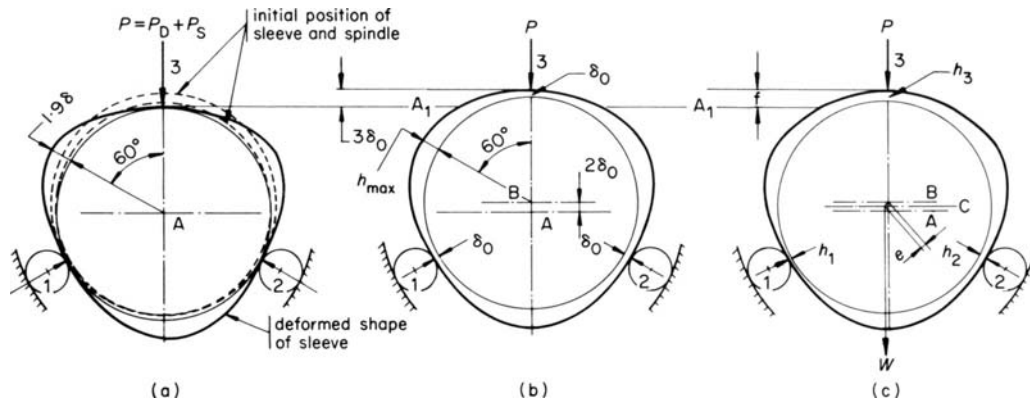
Spindle and sleeve positions: (a) sleeve deformed-spindle stationary; (b) spindle running-external load zero; (c) spindle running-external load W .
